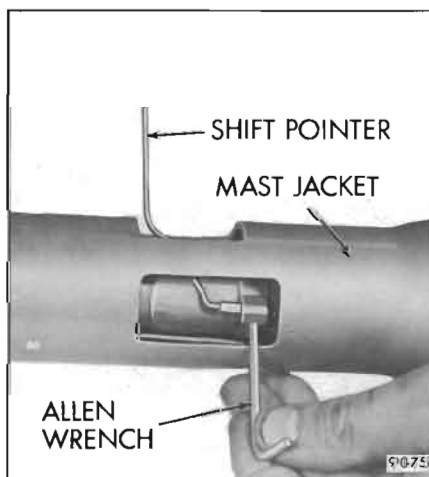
Removing Shift Indicator (43-44000 Series)
